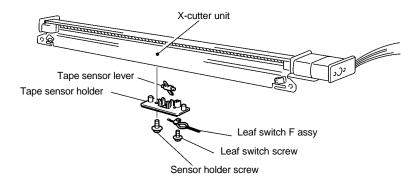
Reassembling the Tape Sensor Unit
